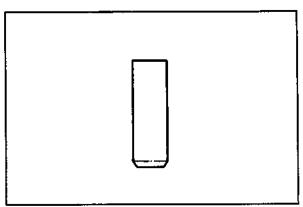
Straight Oil Pump Valve Part No. 26400-82
